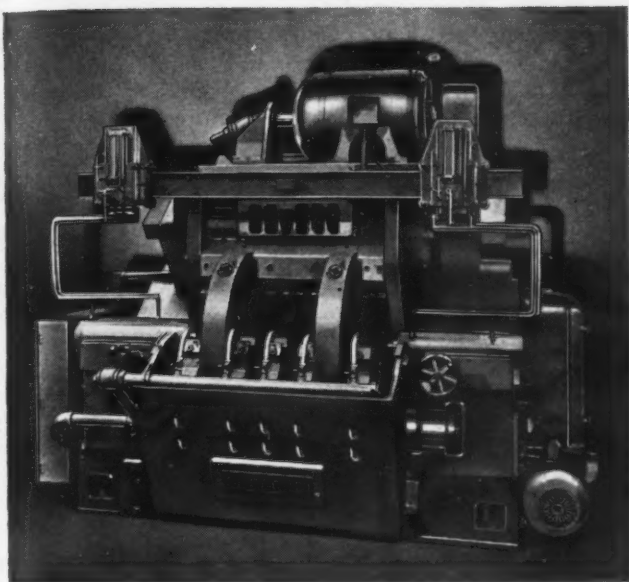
LeBlond Single-spindle Crankshaft Lathe for Rough- and Finish-turning Line Bearings
